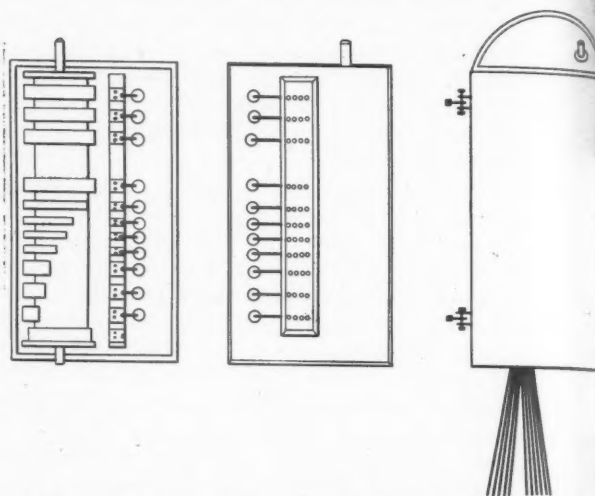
Three views of a type K or R ground controller showing how leads may be brought out the back of the case instead of in the front of long cable leads out of the bottom
